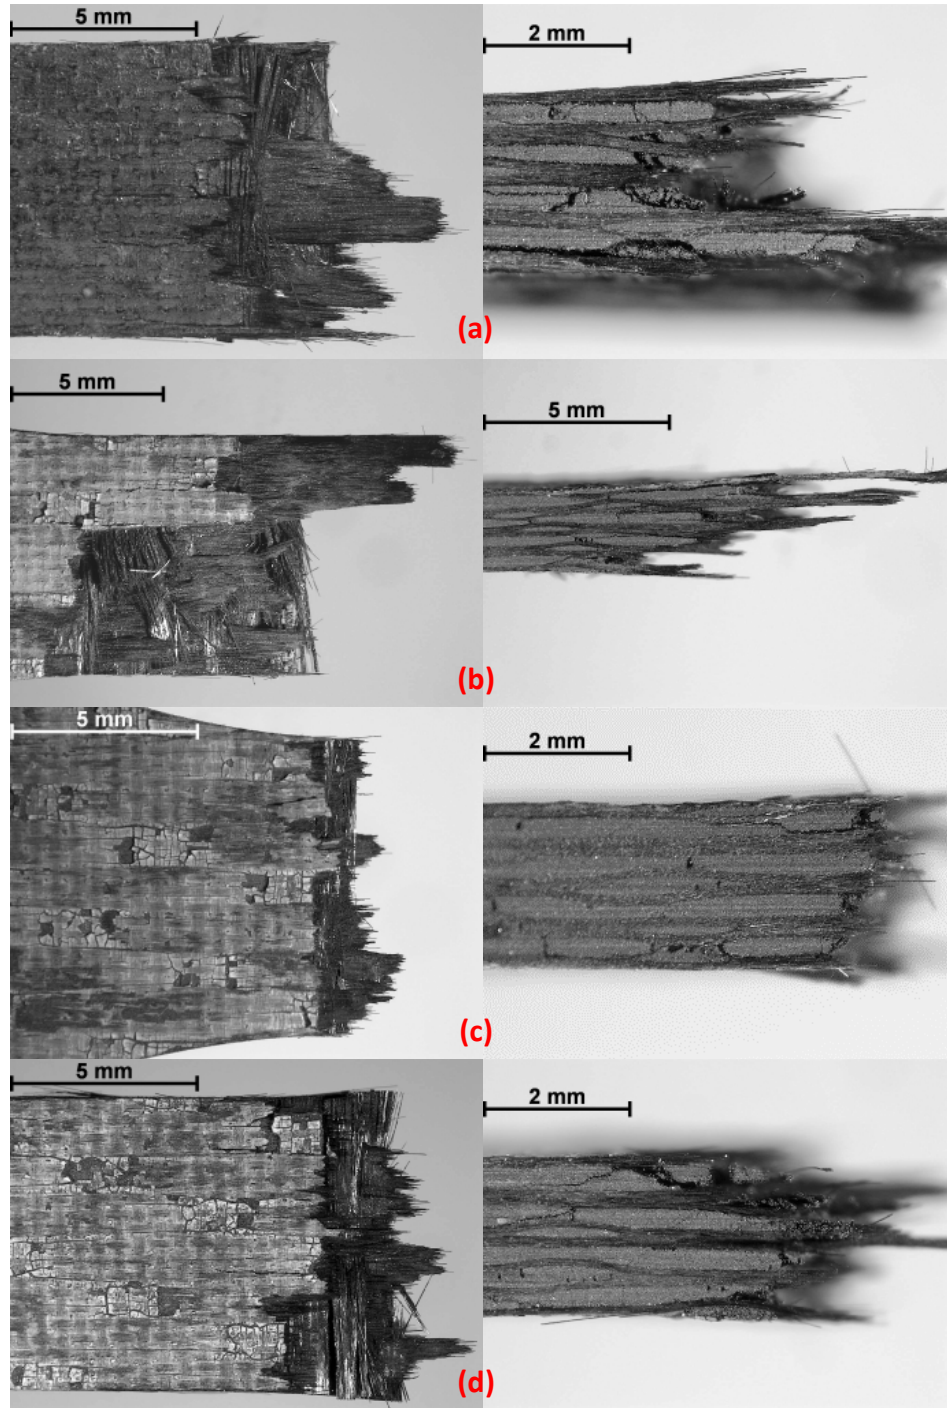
Fracture surfaces obtained in tensile tests of Hi-Nicalon™/SiNC specimens (left: face-up; right: edge-on) – (a) virgin specimen; and specimens with prior heat treatments at (b) 1300°C for 10 h; (c) 1300°C for 100 h; (d) 1200°C for 100 h
